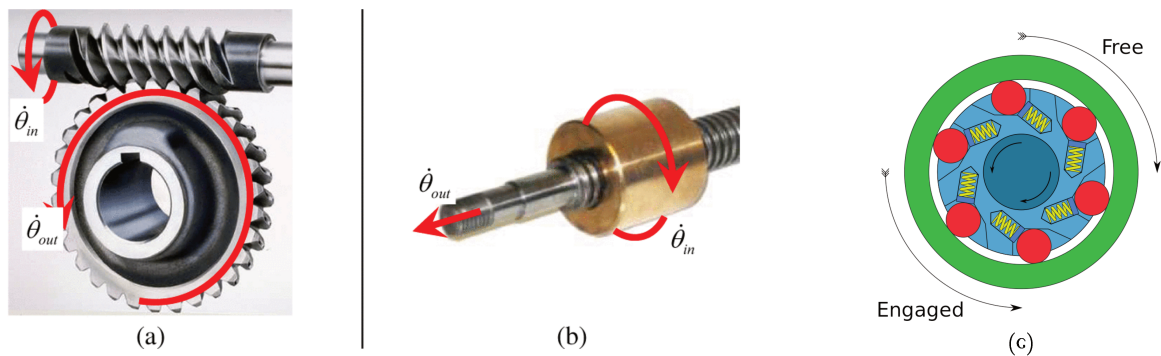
Examples of non-backdrivable mechanisms: (a) "wheel and worm drive"[Krut et al., 2010], (b) lead screw and nut mechanism [Krut et al., 2010], (c) freewheel mechanism [Wikipedia contributors, 2020a].
